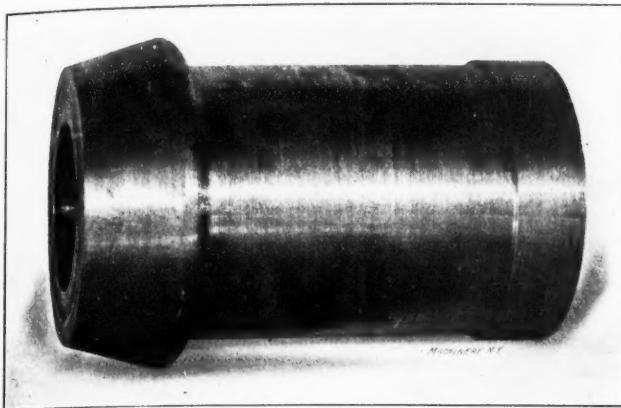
Collet, 4 5/8 Inches in Diameter, finished from 40-point Carbon Steel in 70 Minutes on an Automatic Screw Machine.
